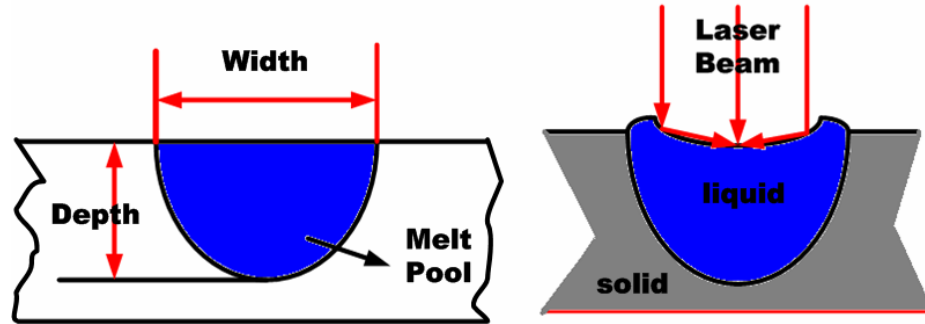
Weld pool (1a) Laser Welding (1b)
